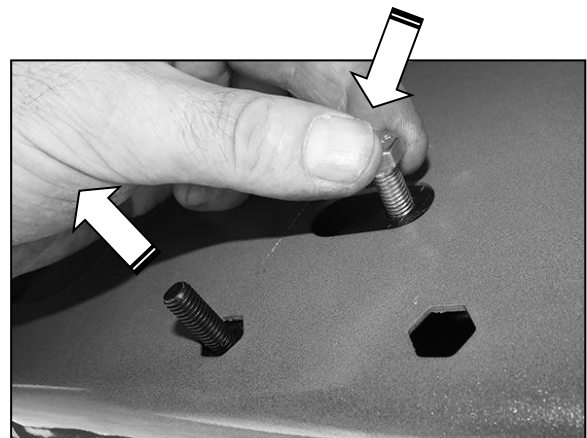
Driver front mounting location (No factory holes in pinch weld 2009-2012 models)
